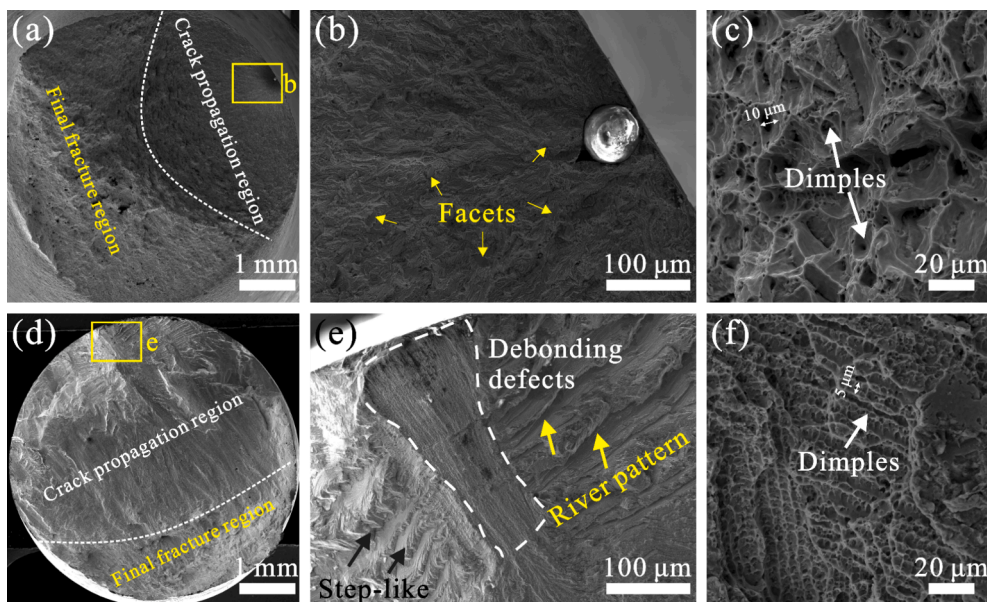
Fatigue fracture surfaces of specimens tested at $\sigma_{max} = 360$ MPa: (a-c) Bare Q235 steel, $N_f = 1,036,139$; (d-f) Bulk HL-DED Inconel 625, $N_f = 1,203,880$.
